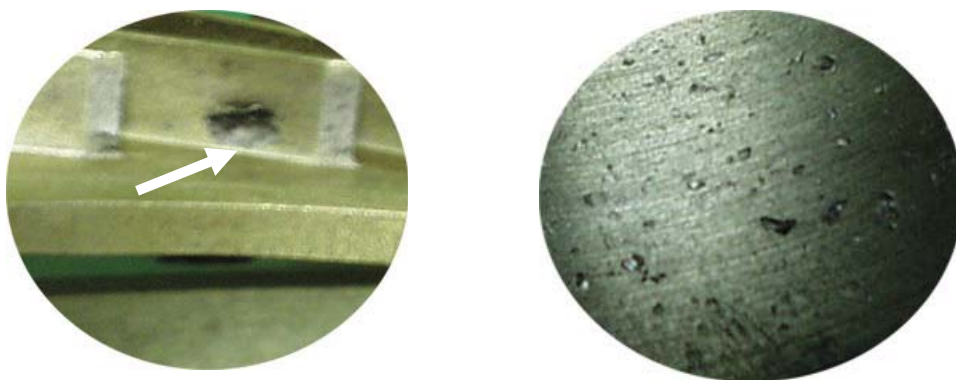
Fatigue crack of the turbine rotor blade of the turbocharger
